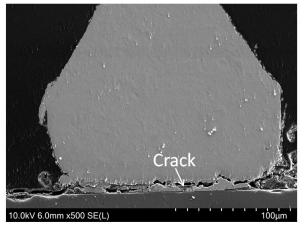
Ag wedge bonding annealed in 300° C for 50 hrs with molded IC packages
